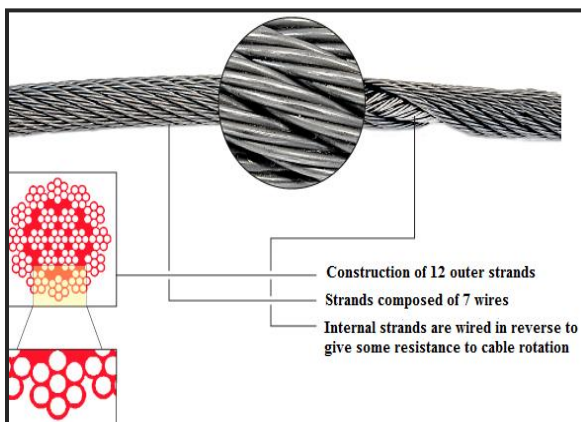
Steel Wire Rope of type 19*7 and antigratory construction (1x7 + 6x7 + 12x7)
